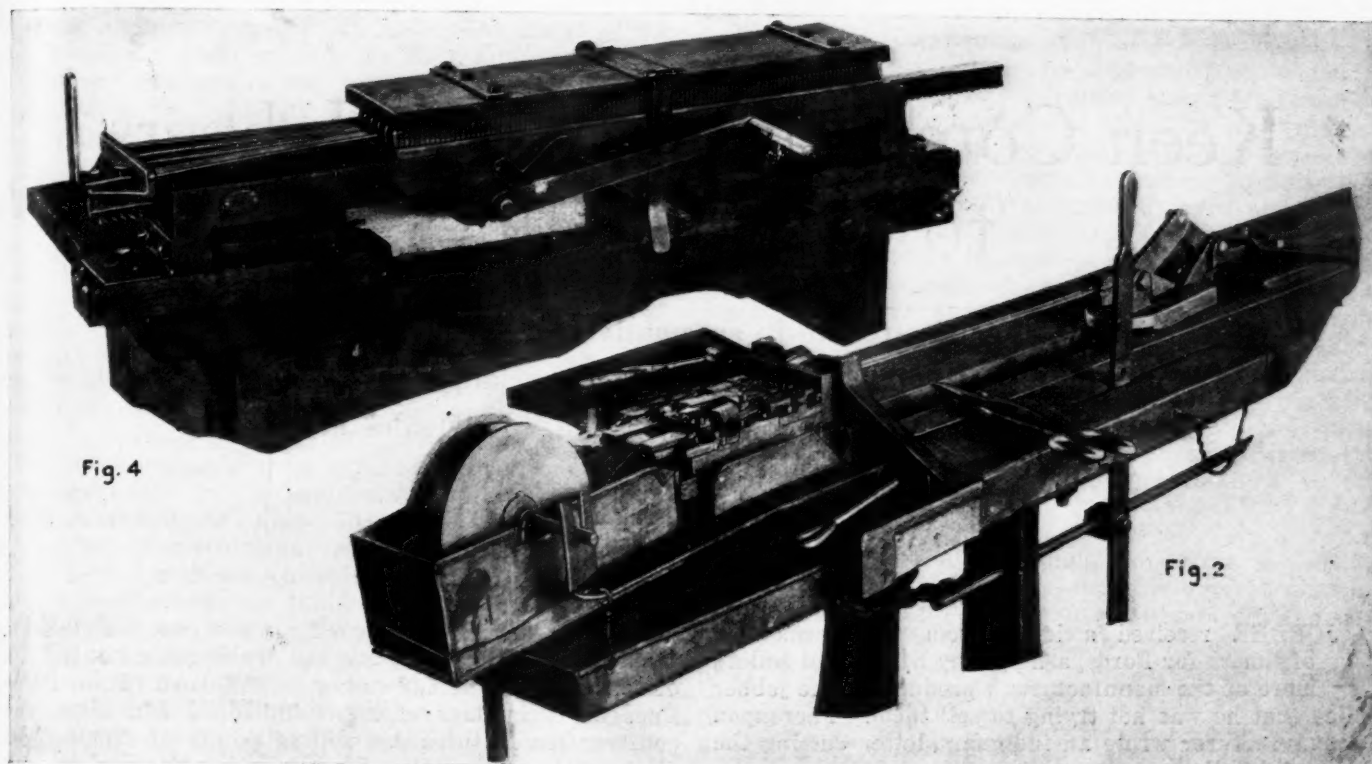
Drawing the brass tube through a forming die. The brass ribbon used is 0.009 in. thick. The tube is formed in a single operation. Fig. 4—Pushing the tubes through the fins as they are held in the loading jig. This is a hand operation. A single operator performs this operation and cares for the punch shown in Fig. 3. While he is pushing the tubes through fins held in one jig, another jig is being loaded in the punch
